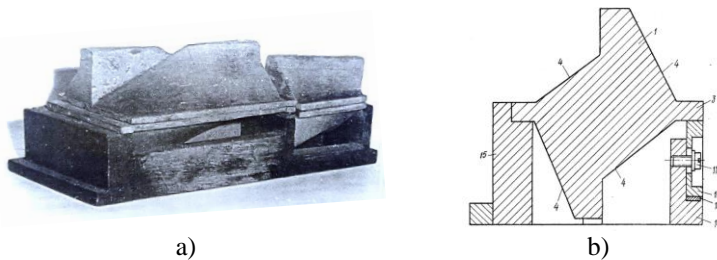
Set of tools for rotary spinning of necks of relatively small diameter with quick-change working part (a) and cross-section of the assembled instrument (b)
